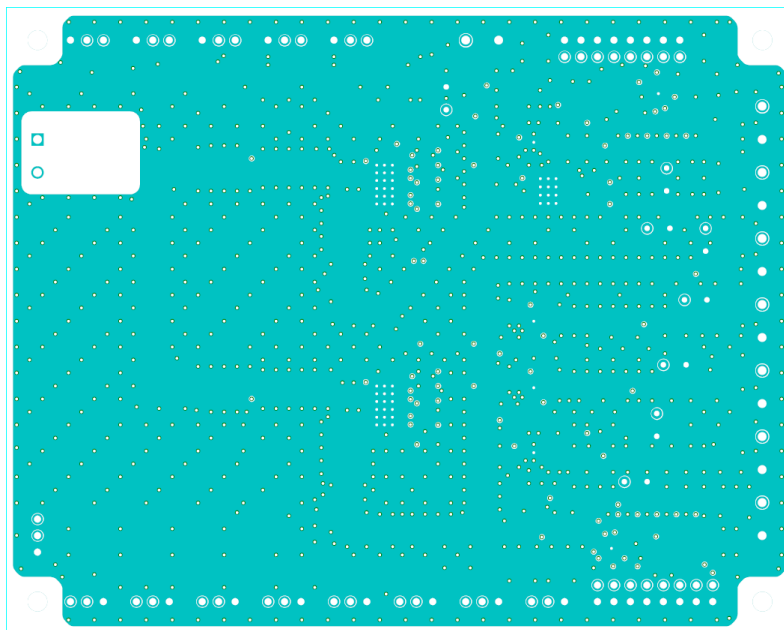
REFRPT001-EVK-001 L1 inner second layer (Top View)
